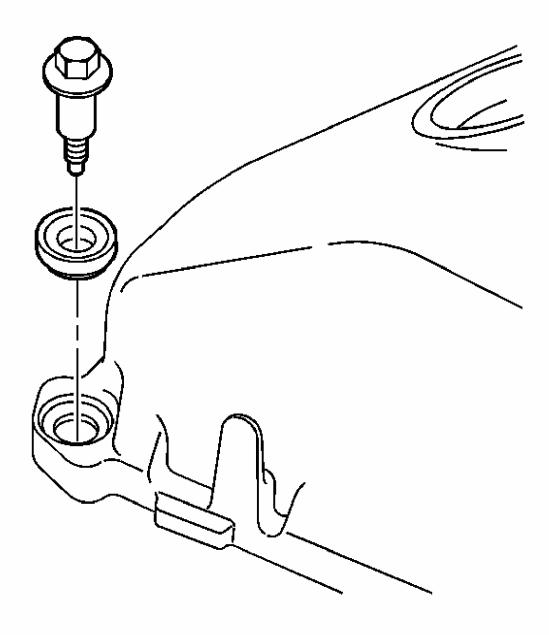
View Of Camshaft Cover Bolts Courtesy of GENERAL MOTORS CORP.
